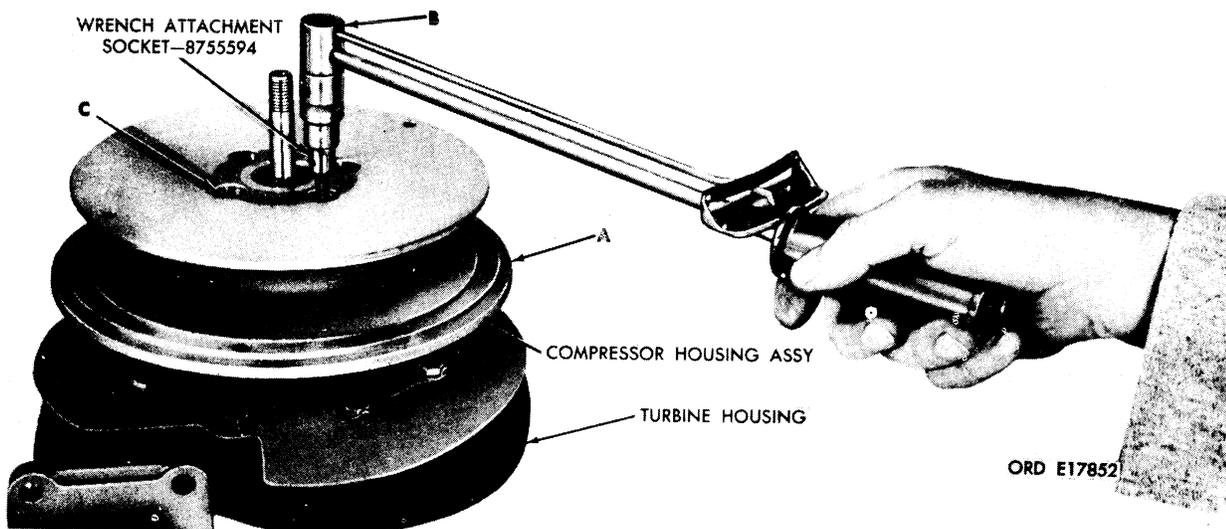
INSTALLING COMPRESSOR HOUSING ON TURBOCHARGERS 7748900 AND 10935279.
